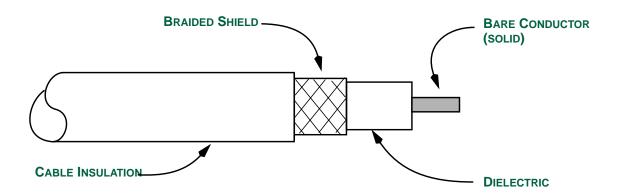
TYPICAL CO-AXIAL CABLE STRIPPING
